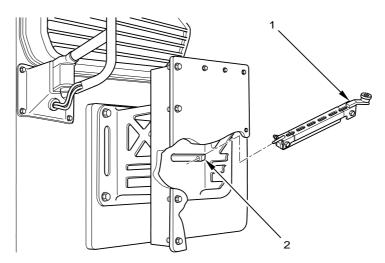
Combat Lock Shaft and Universal Combat Lock Tool – Passenger Side.
